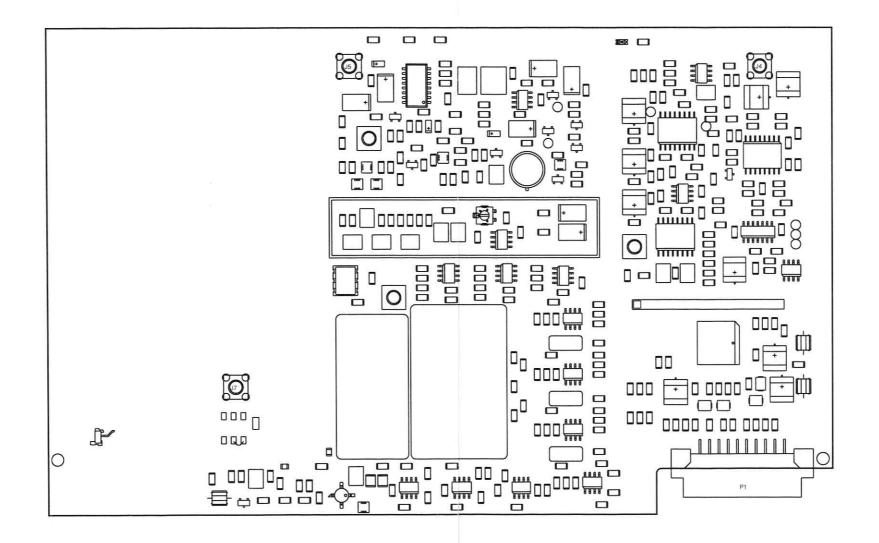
Test Set (34A5) Assembly, Cable Locator and Interconnect Diagram (Sheet 7 of 7)
